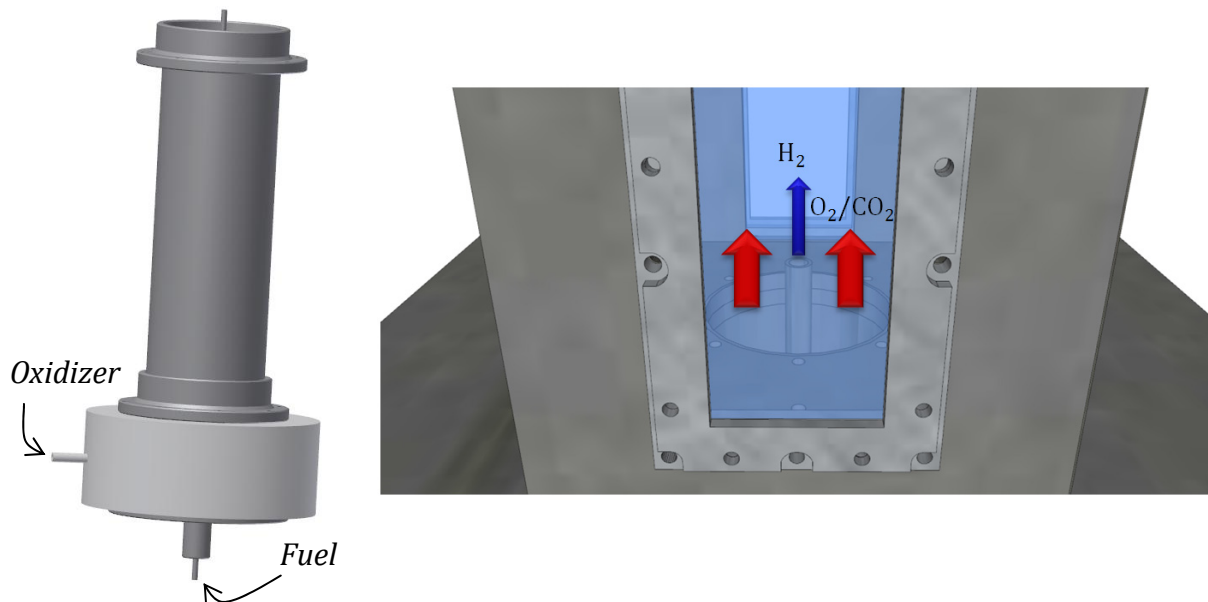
Left: CAD drawing of the coflow block with 3.6-mm-inside diameter nozzle. Right: CAD drawing of the coflow top inside the oxy-fuel combustion chamber.
